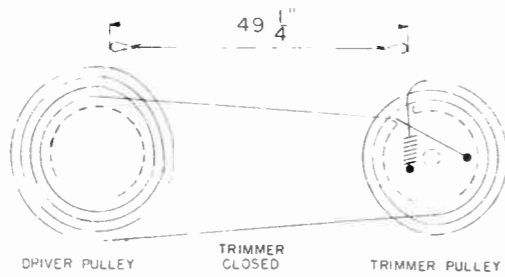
DRIVE STRING ARRANGEMENT FOR ANTENNA TRIMMER
